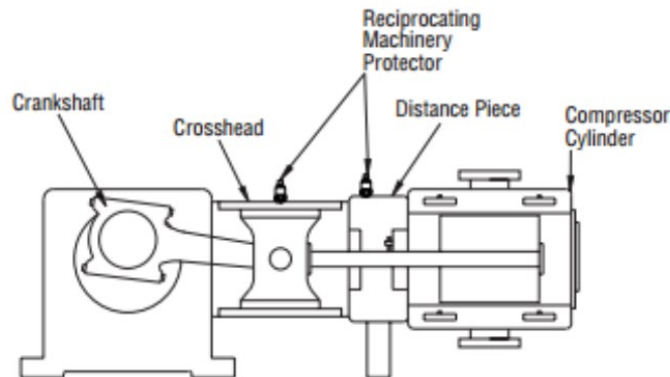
Reciprocating machinery protector mounted on the crosshead.
